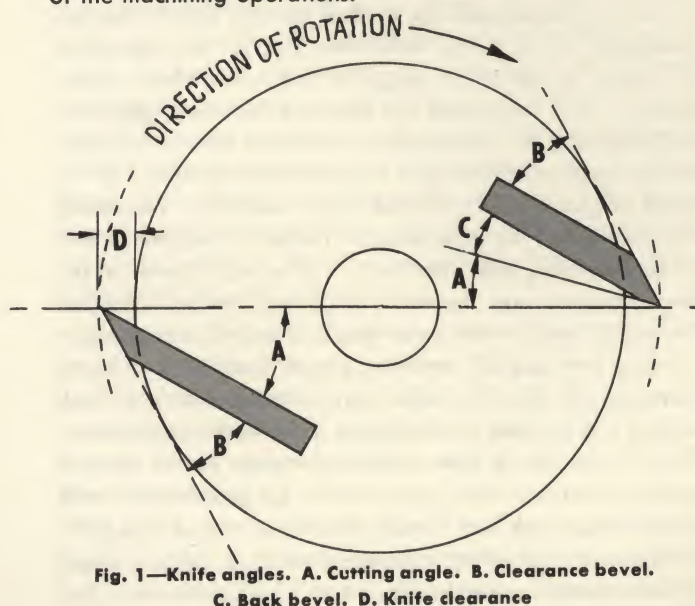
Knife angles. A. Cutting angle. B. Clearance bevel. C. Back bevel. D. Knife clearance
